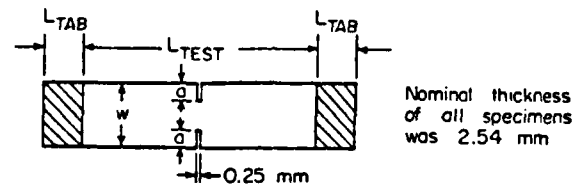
Double edge notch specimen geometry. (SMC-R50)
